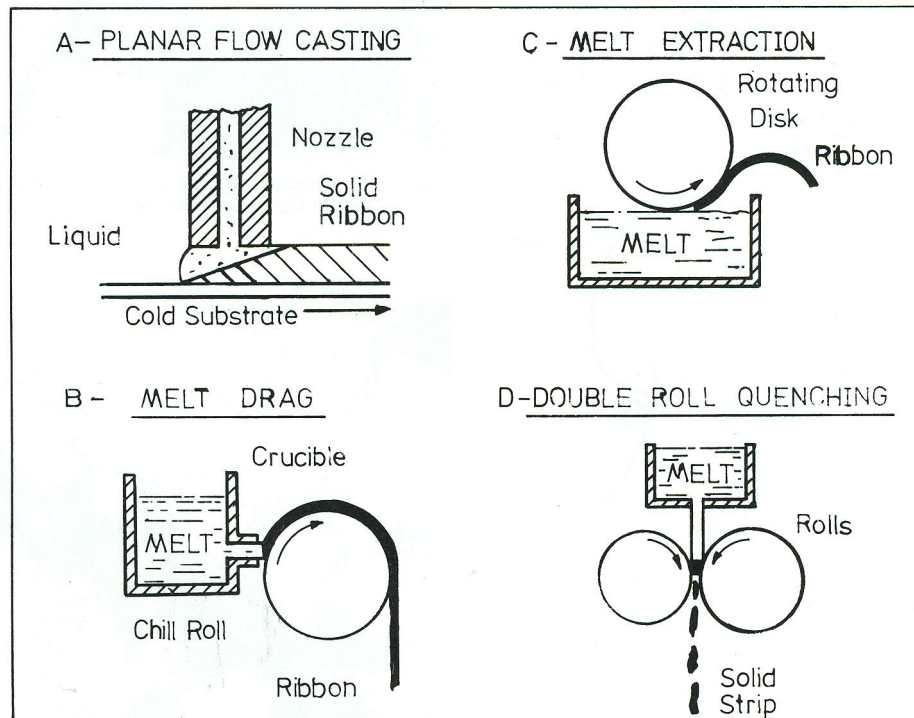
Another 4 techniques for the production of strip by rapid solidification. a. Planar Flow casting (continuous ribbon with 3 mm in width and until to $50\ \mu\text{m}$ in thickness); b. Melt Drag (ribbons with thickness from 25 to $1000\ \mu\text{m}$); c. Melt Extraction; d. Double Roll Quenching (particles or strips as thick as $200\ \mu\text{m}$) (5).
